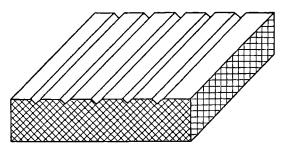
Brick with grooves for heating of cylinder-shaped parts in horizontal position
